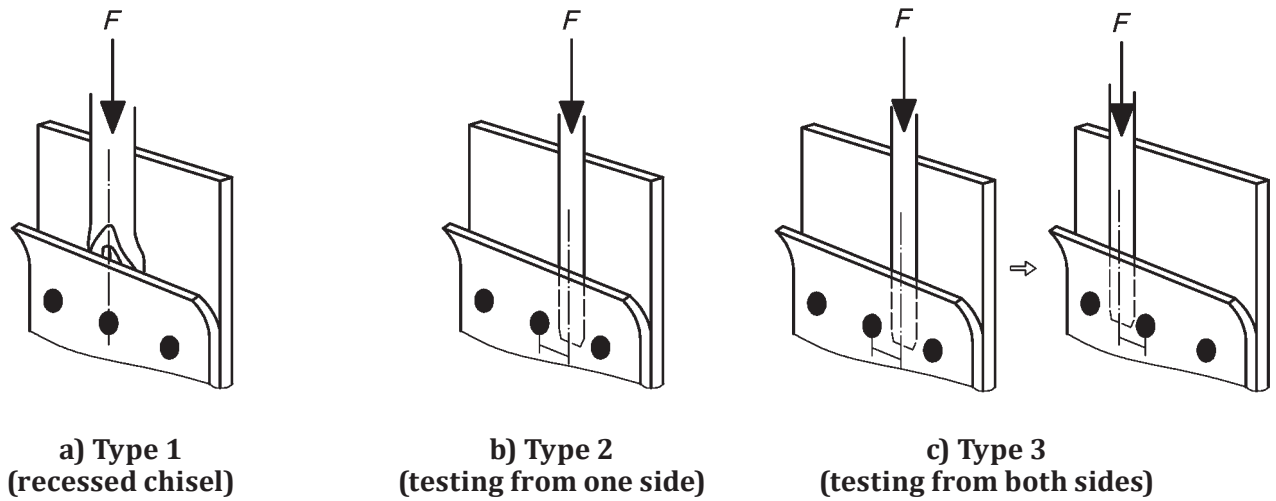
Chisel testing of resistance spot and projection welded joints
